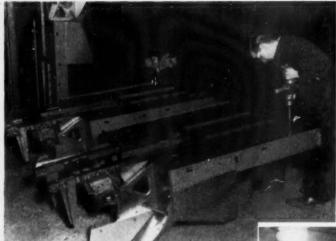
(left).—Final operations on complete frame include tapping holes and freeing already tapped holes of weld splatter
